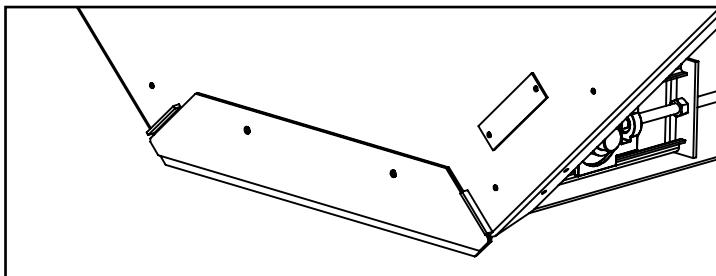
A - 1 1/2" (3.81 cm) or 2" (5.08 cm) Opening (Style I)
